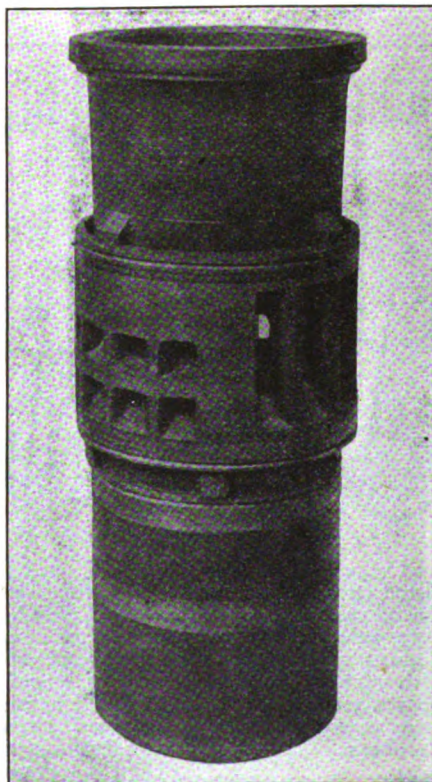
CYLINDER LINER USED ON 2-CYCLE DIESEL ENGINES
